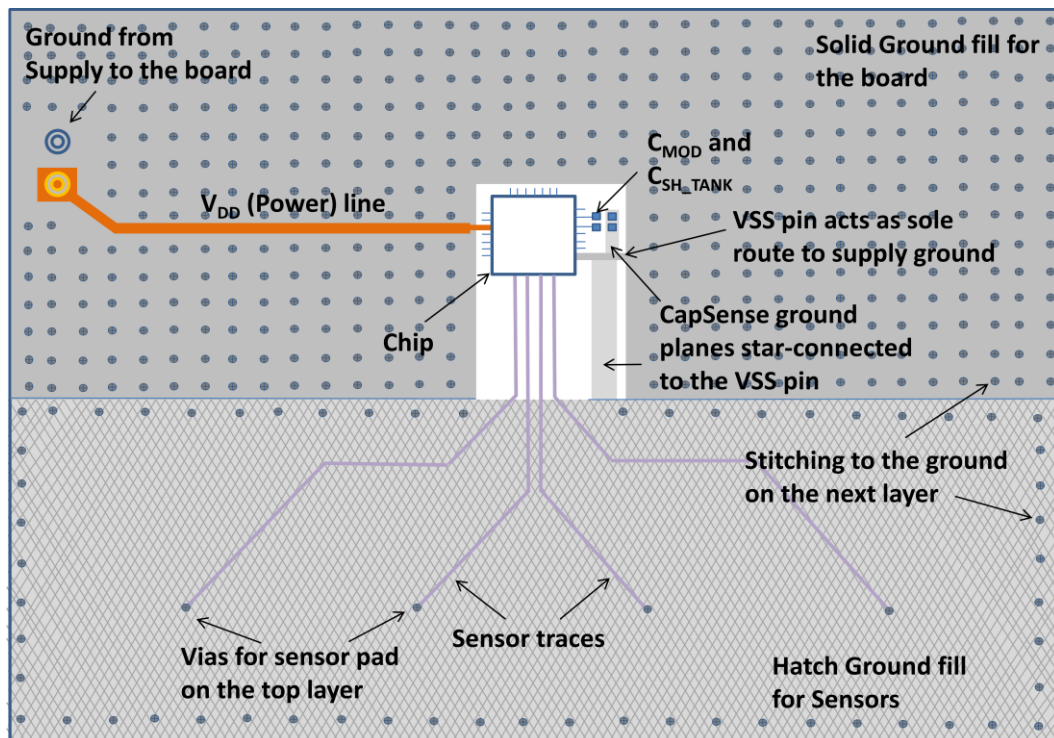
PCB Bottom Layer Layout Using a Chip Without E-pad
